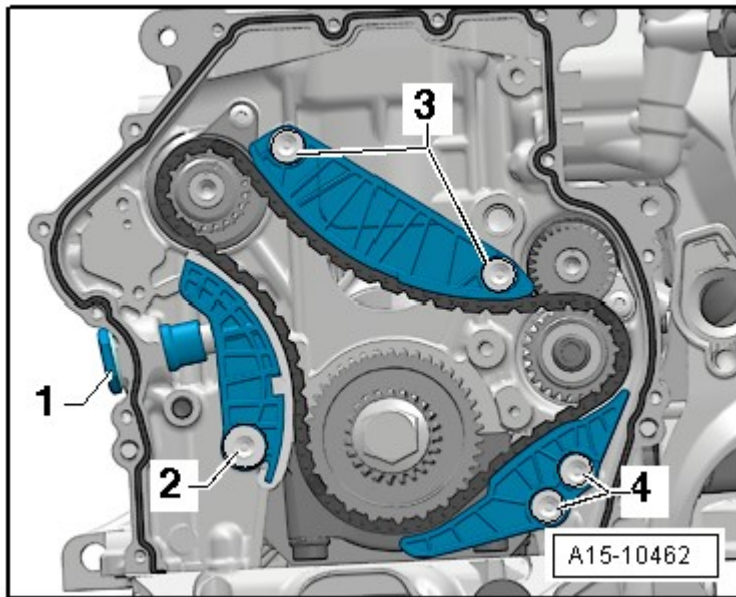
Identifying Balance Shaft Timing Chain, Tensioning Rail And Guide Rails
